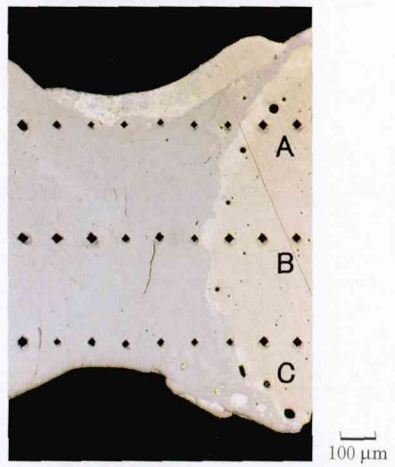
Structure of a welded surface by a metallographic microscope (TI-PD)
